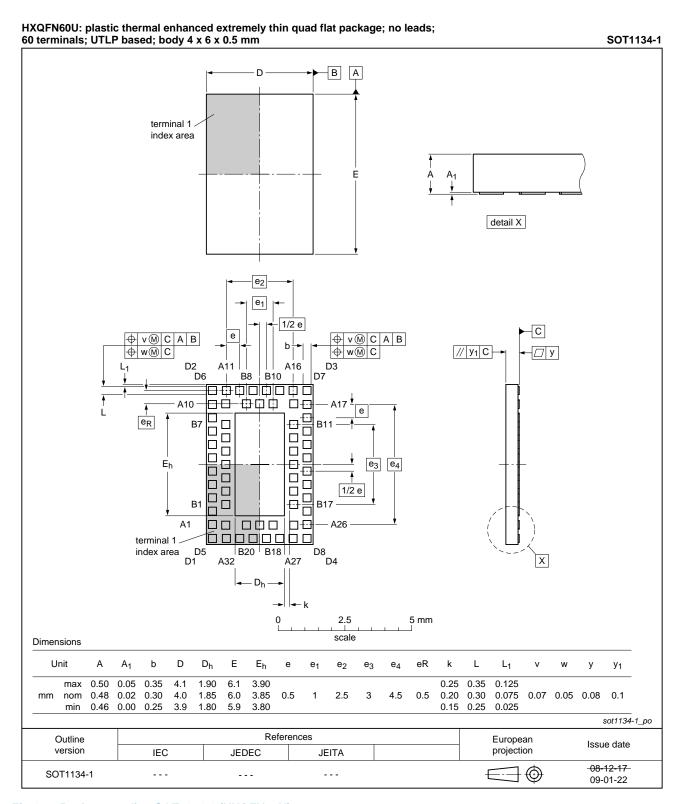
Package outline SOT1134-1 (HXQFN60U)
